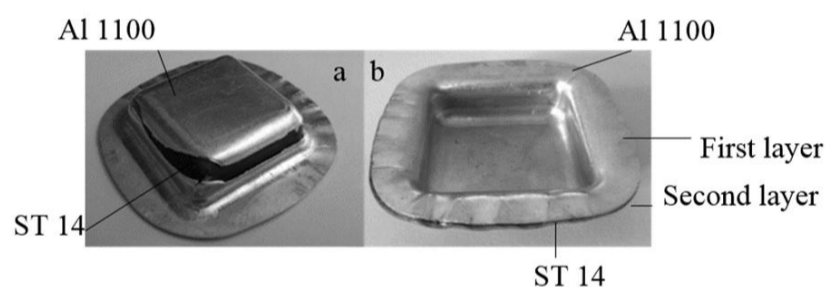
The sample manufactured with two layers sheet in experimental work arrangement a) ST-AL sheet b) AL-ST sheet
